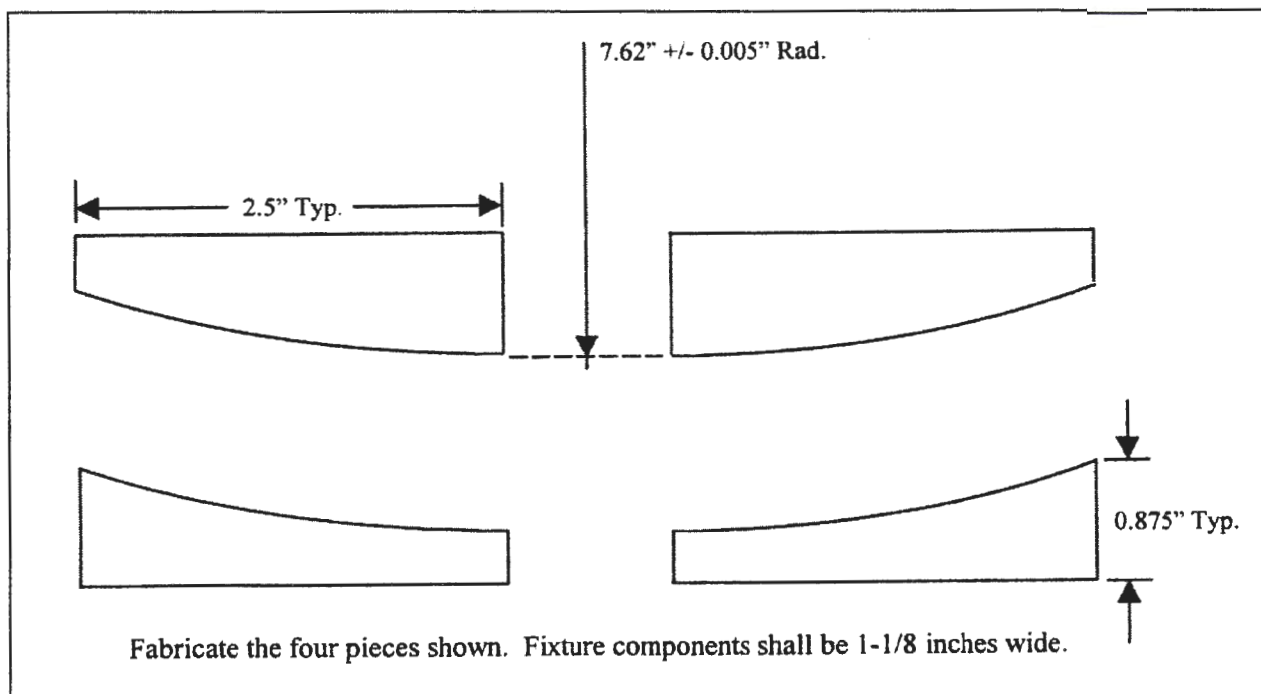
Seam weld fixture dimensions (material shall be AISI 4XXX steel, HRC 35–40).
